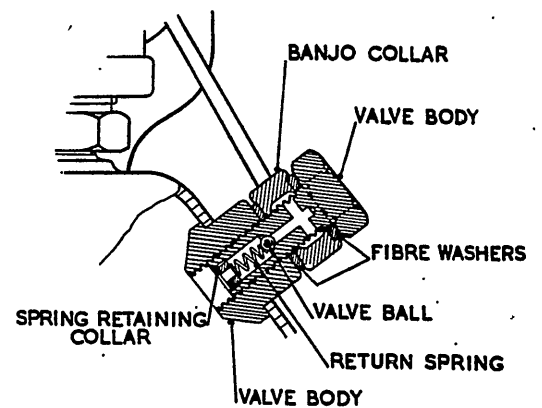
Section through non-return valve (Miller Type C.S.C.103 gun)
